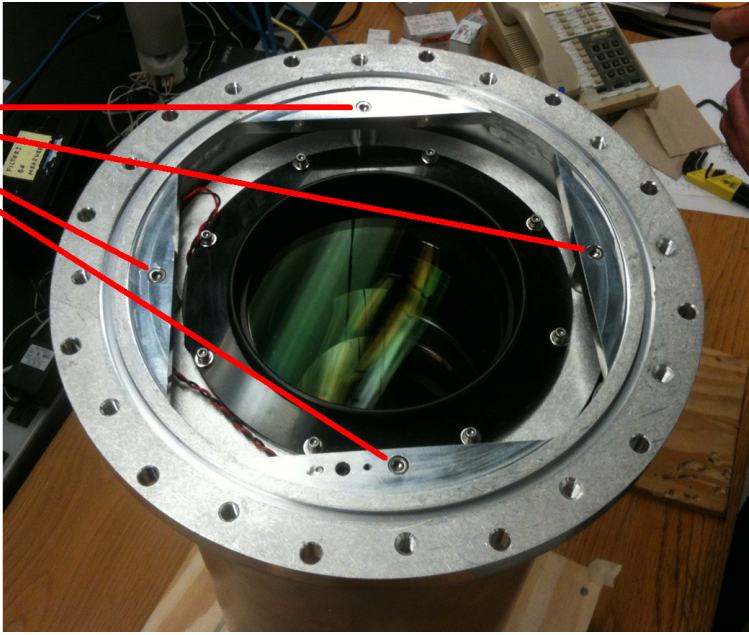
The front of XSC1 without the front flange. The front weld flange jets inward about an inch to form four perpendicular edges, allowing the four rods of the internal structure to be fastened directly to the front weld flange.
